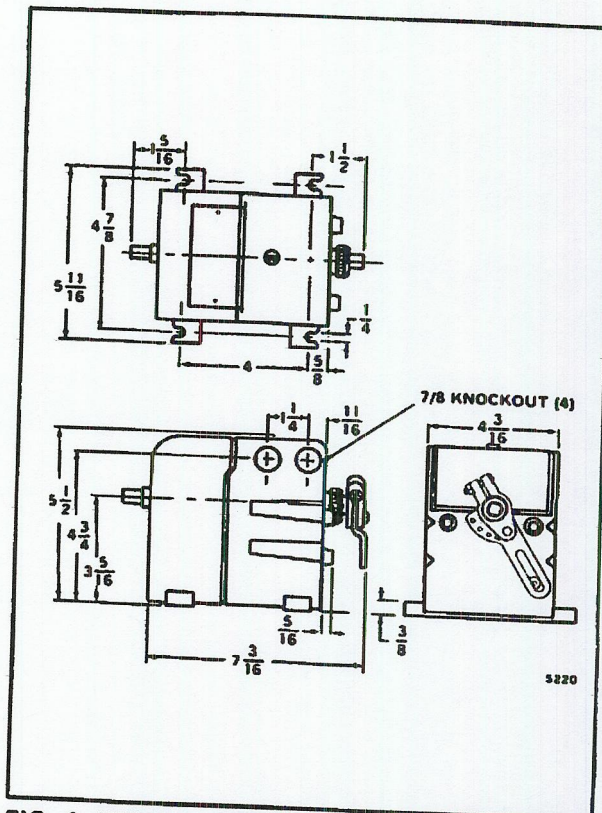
M734B,C APPROXIMATE DIMENSIONS, IN INCHES.
